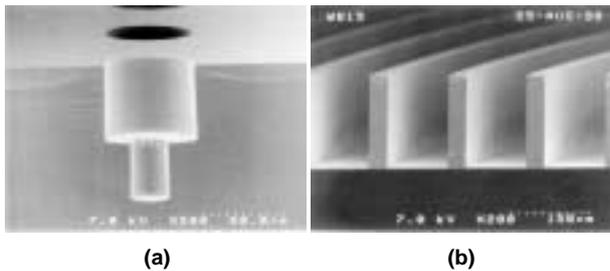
Examples of Machined Ink-Jet Printer Heads
